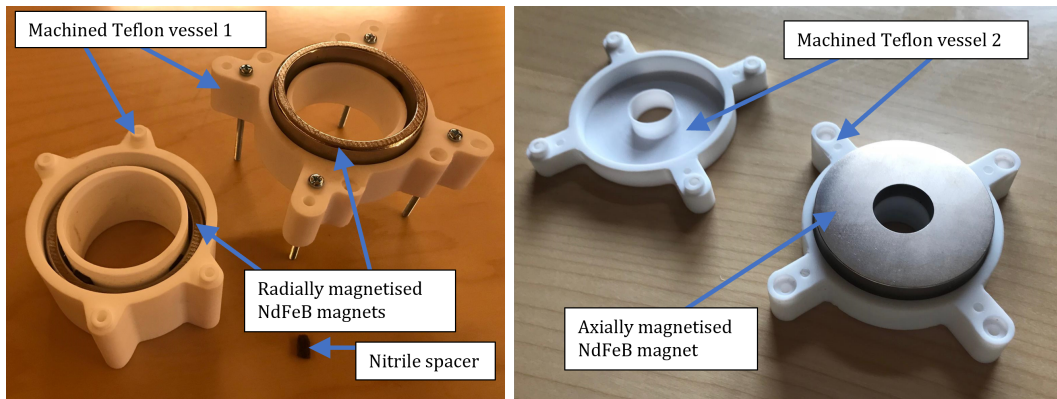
Physical annular NdFeB magnets sitting inside the machined Teflon housing prior to assembly.
